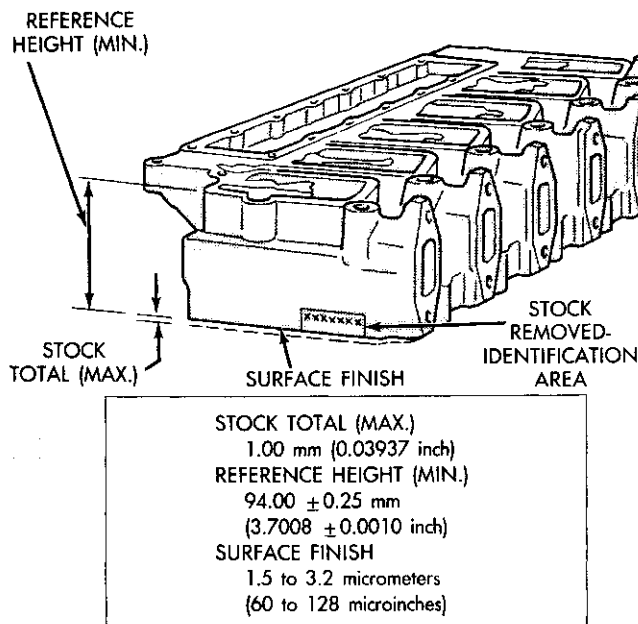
Cylinder Head Combustion Deck Face Measurement
